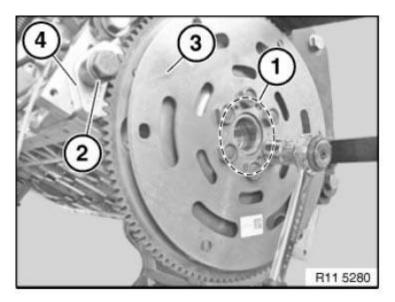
Identifying Flywheel With Bolts And Special Tool Courtesy of BMW OF NORTH AMERICA, INC.
